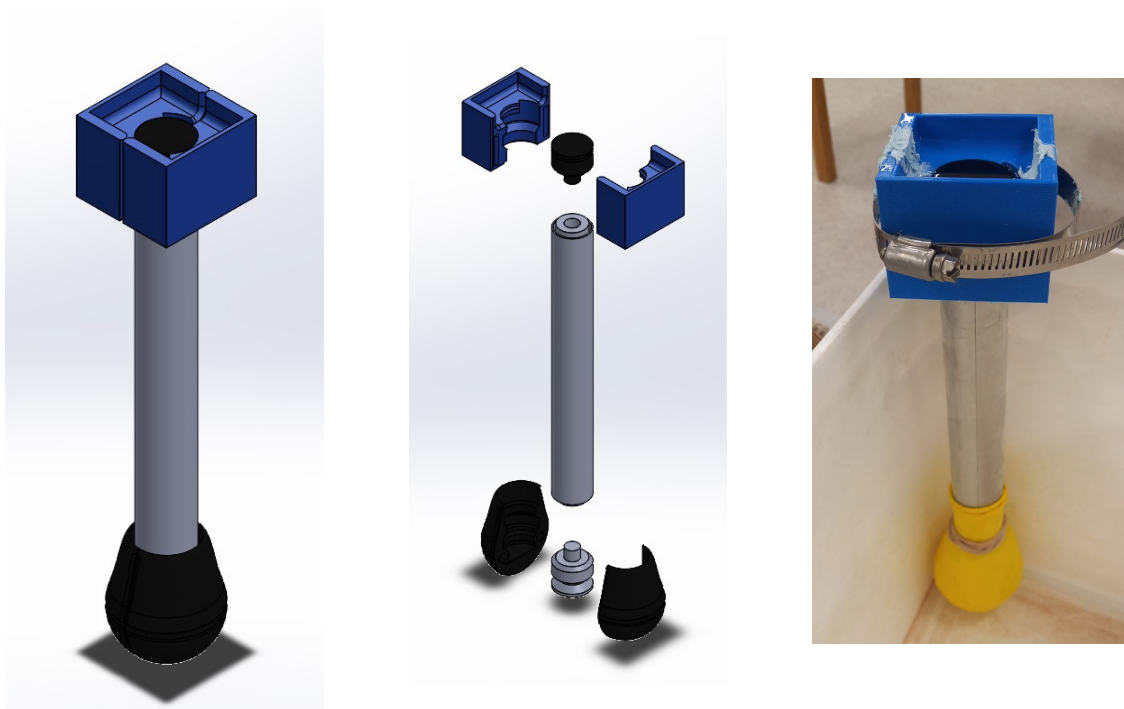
Collapsible tube construction method: 3D view of the assembly (left), exploded view (center) and figure of the real assembly with the yellow balloon in the bottom part (right)
